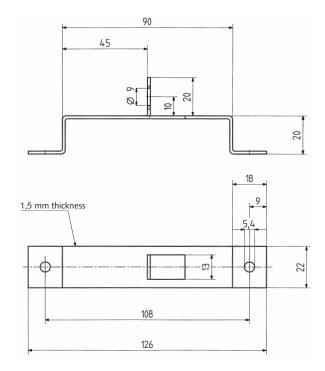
Mounting plate Art. No. 3.520.450 for connector
